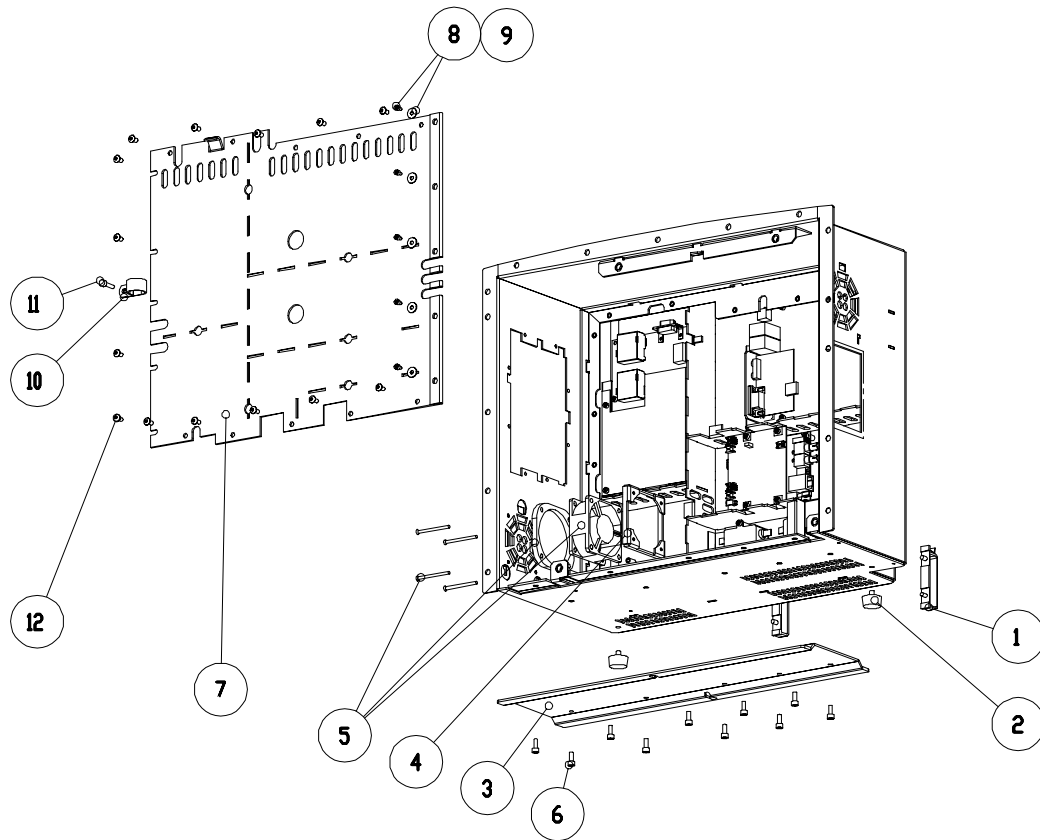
Exploded view of the MRI Shield, N-MRI2 Rev. 01, Back shell unit
